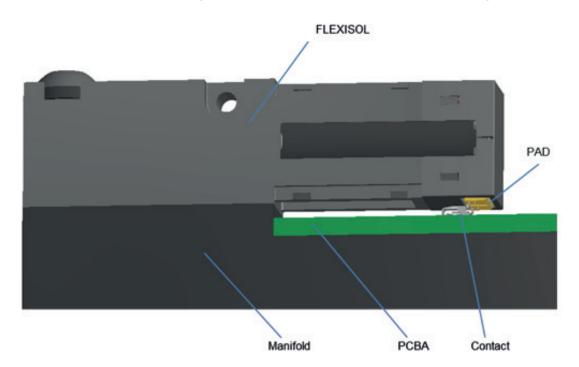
FLEXISOL with PAD connection installed on manifold with a PCBA.
